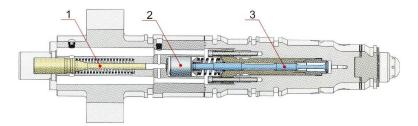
The mechanical-driven valve for the fuel gas to the engine pre-chamber.
